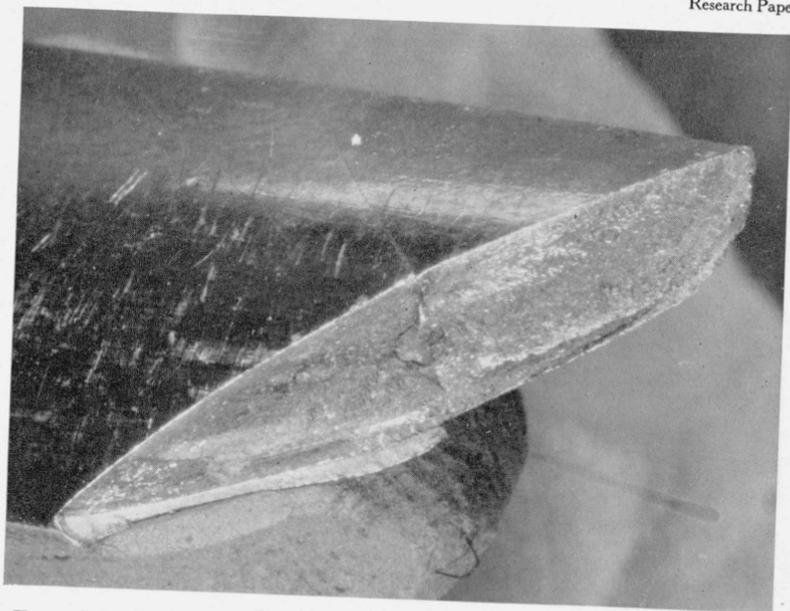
Torsional fatigue fracture in 18-8 stainless steel tierod;  $\times 5$ .
